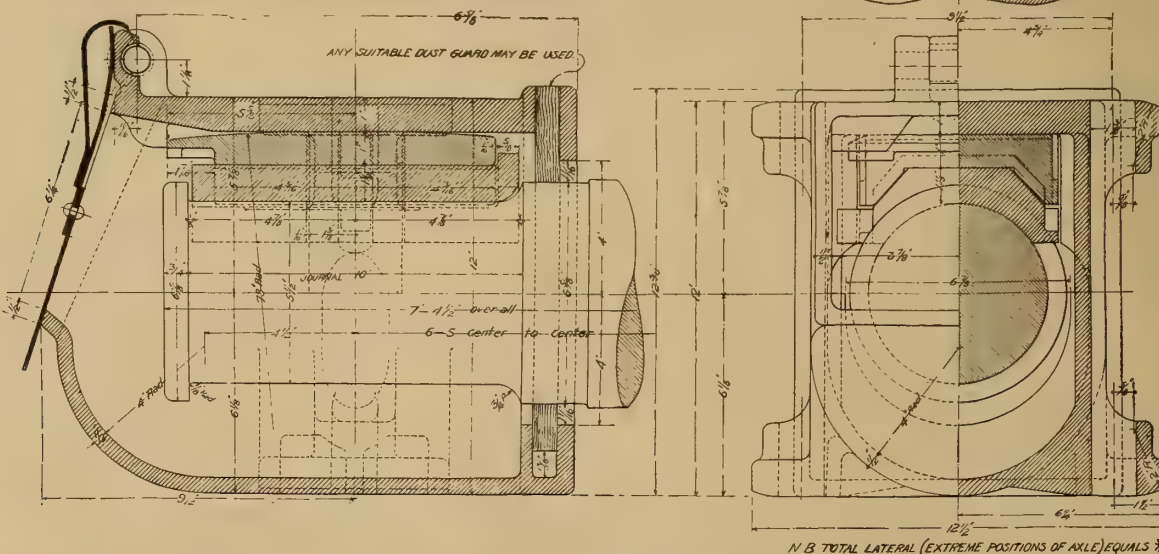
STANDARD BEARING, WEDGE AND LID FOR JOURNAL 5 IN. x 9 IN. SHEET 15.
